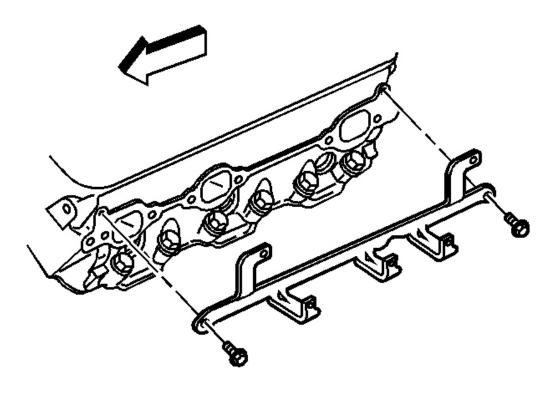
Locating Spark Plug Wire Support Courtesy of GENERAL MOTORS CORP.
